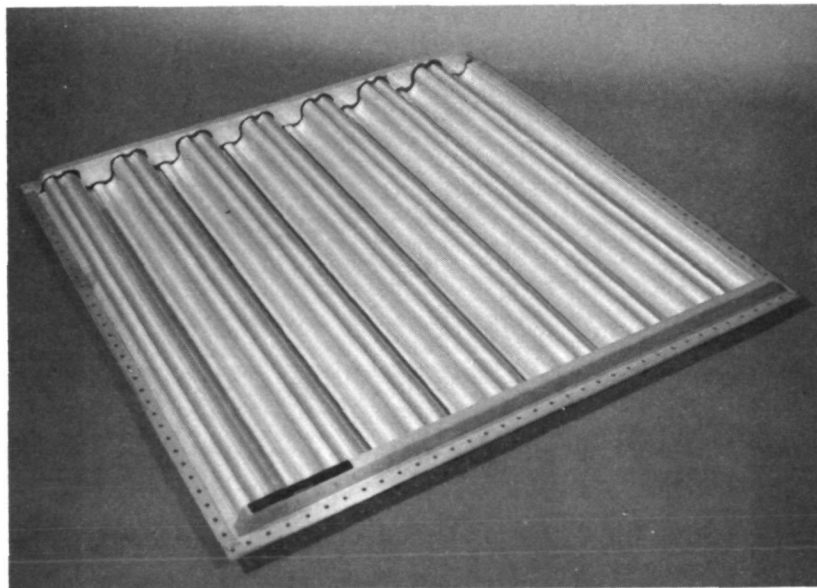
FLUTED SINGLE SHEET TEST PANEL
